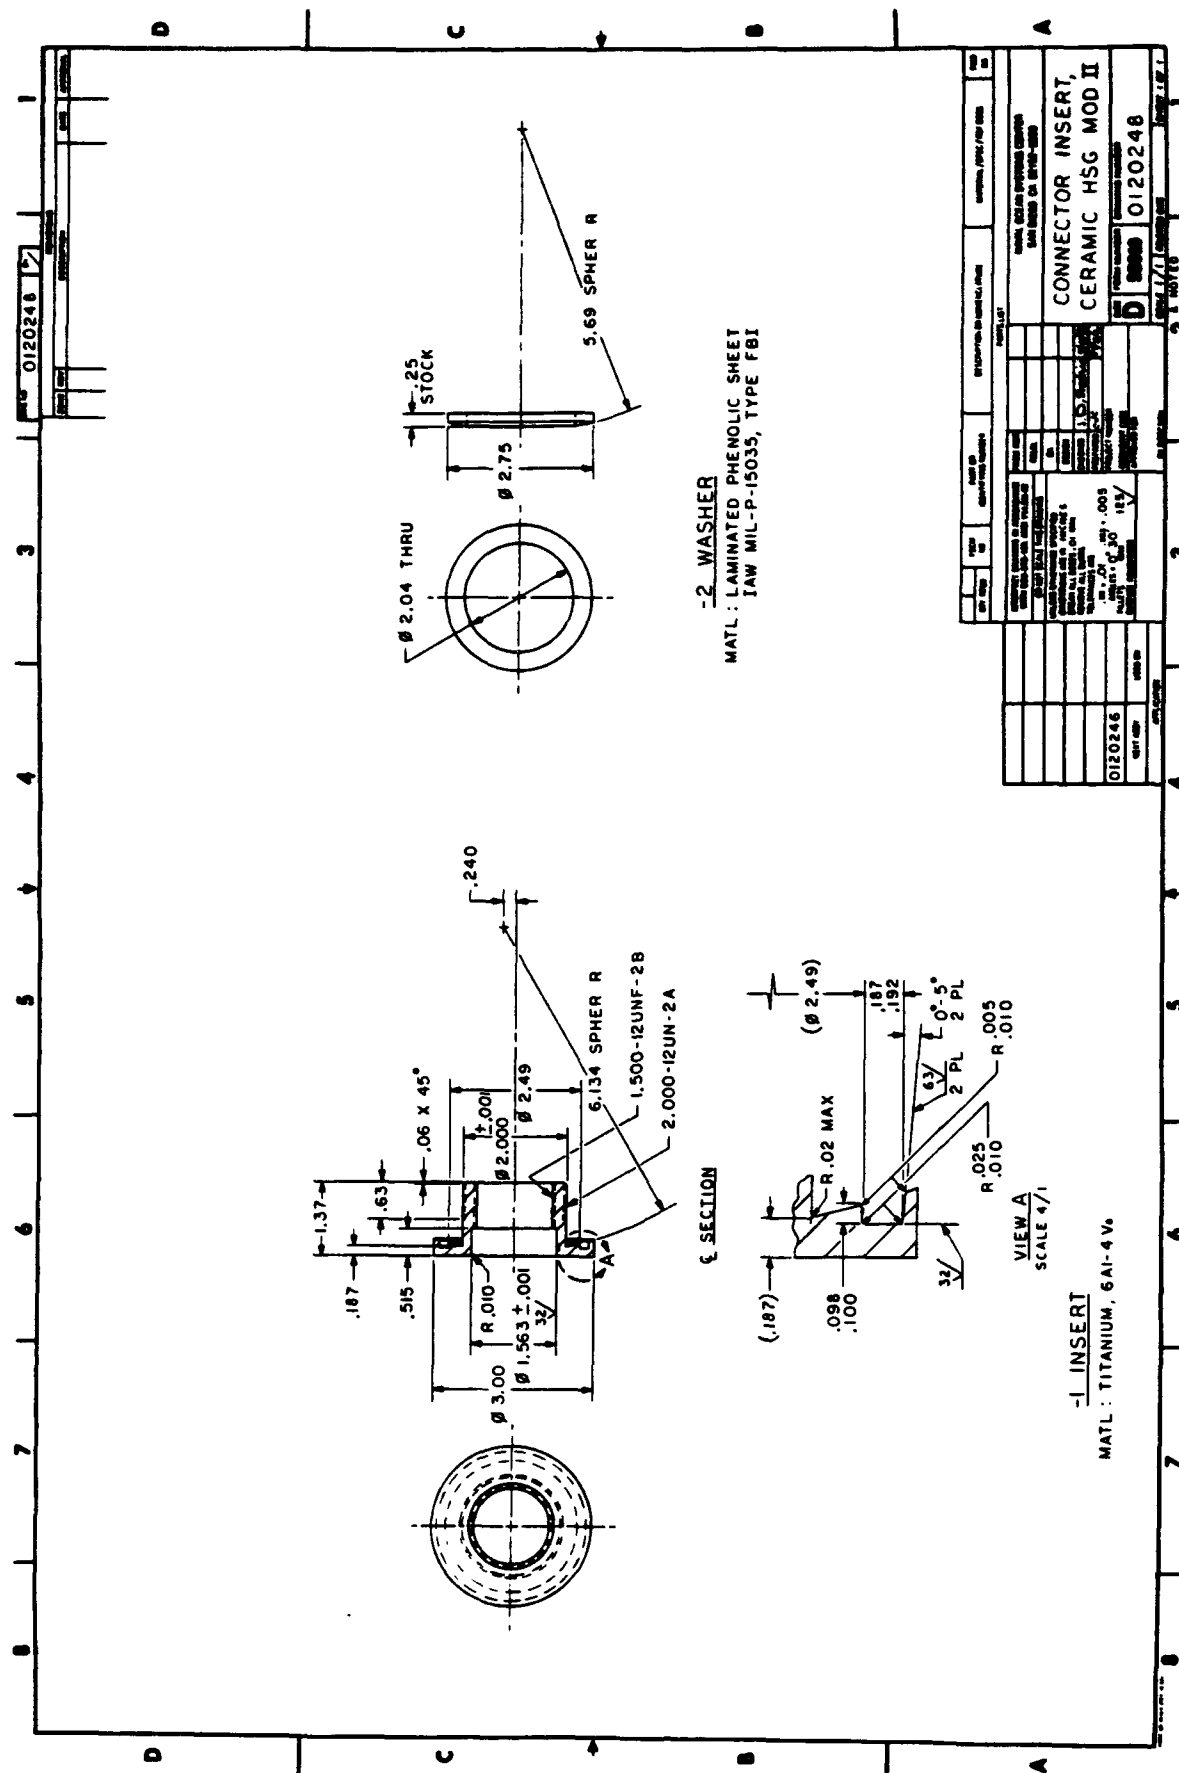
Connector Insert (Revision 0) without phenolic bearing pad for Mod 2 hemisphere that initiated cracks at the edge of penetration.
